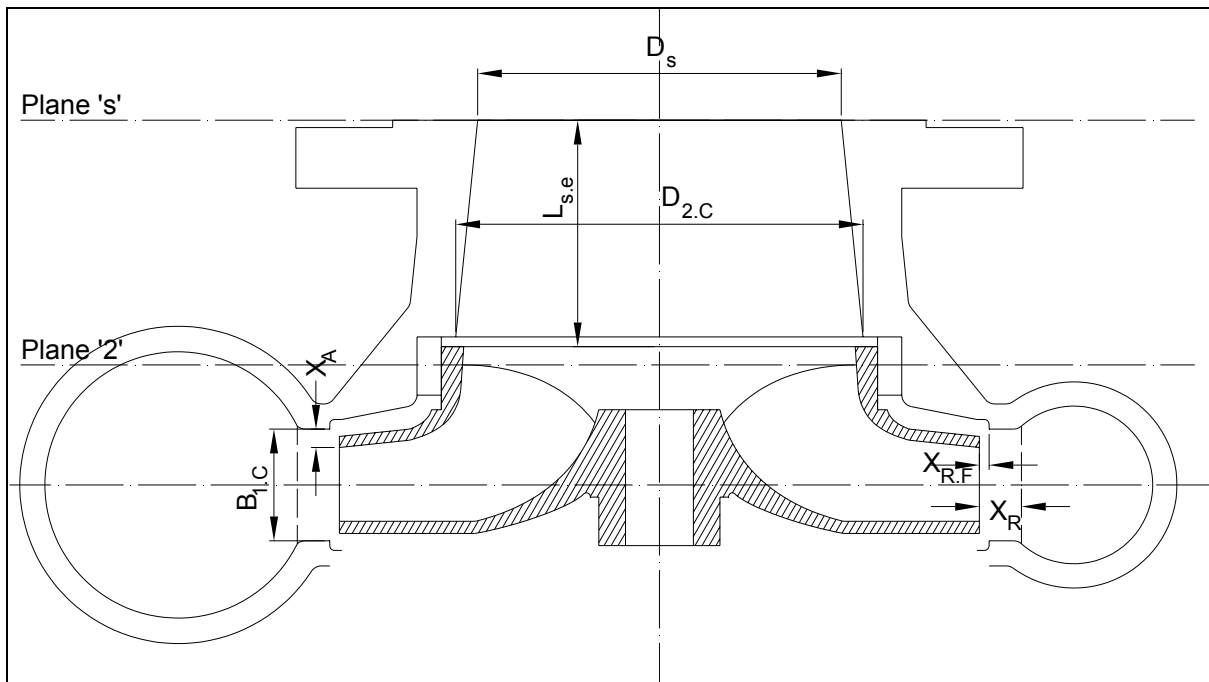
, Cross-section view of the impeller and volute casing a radial PAT
